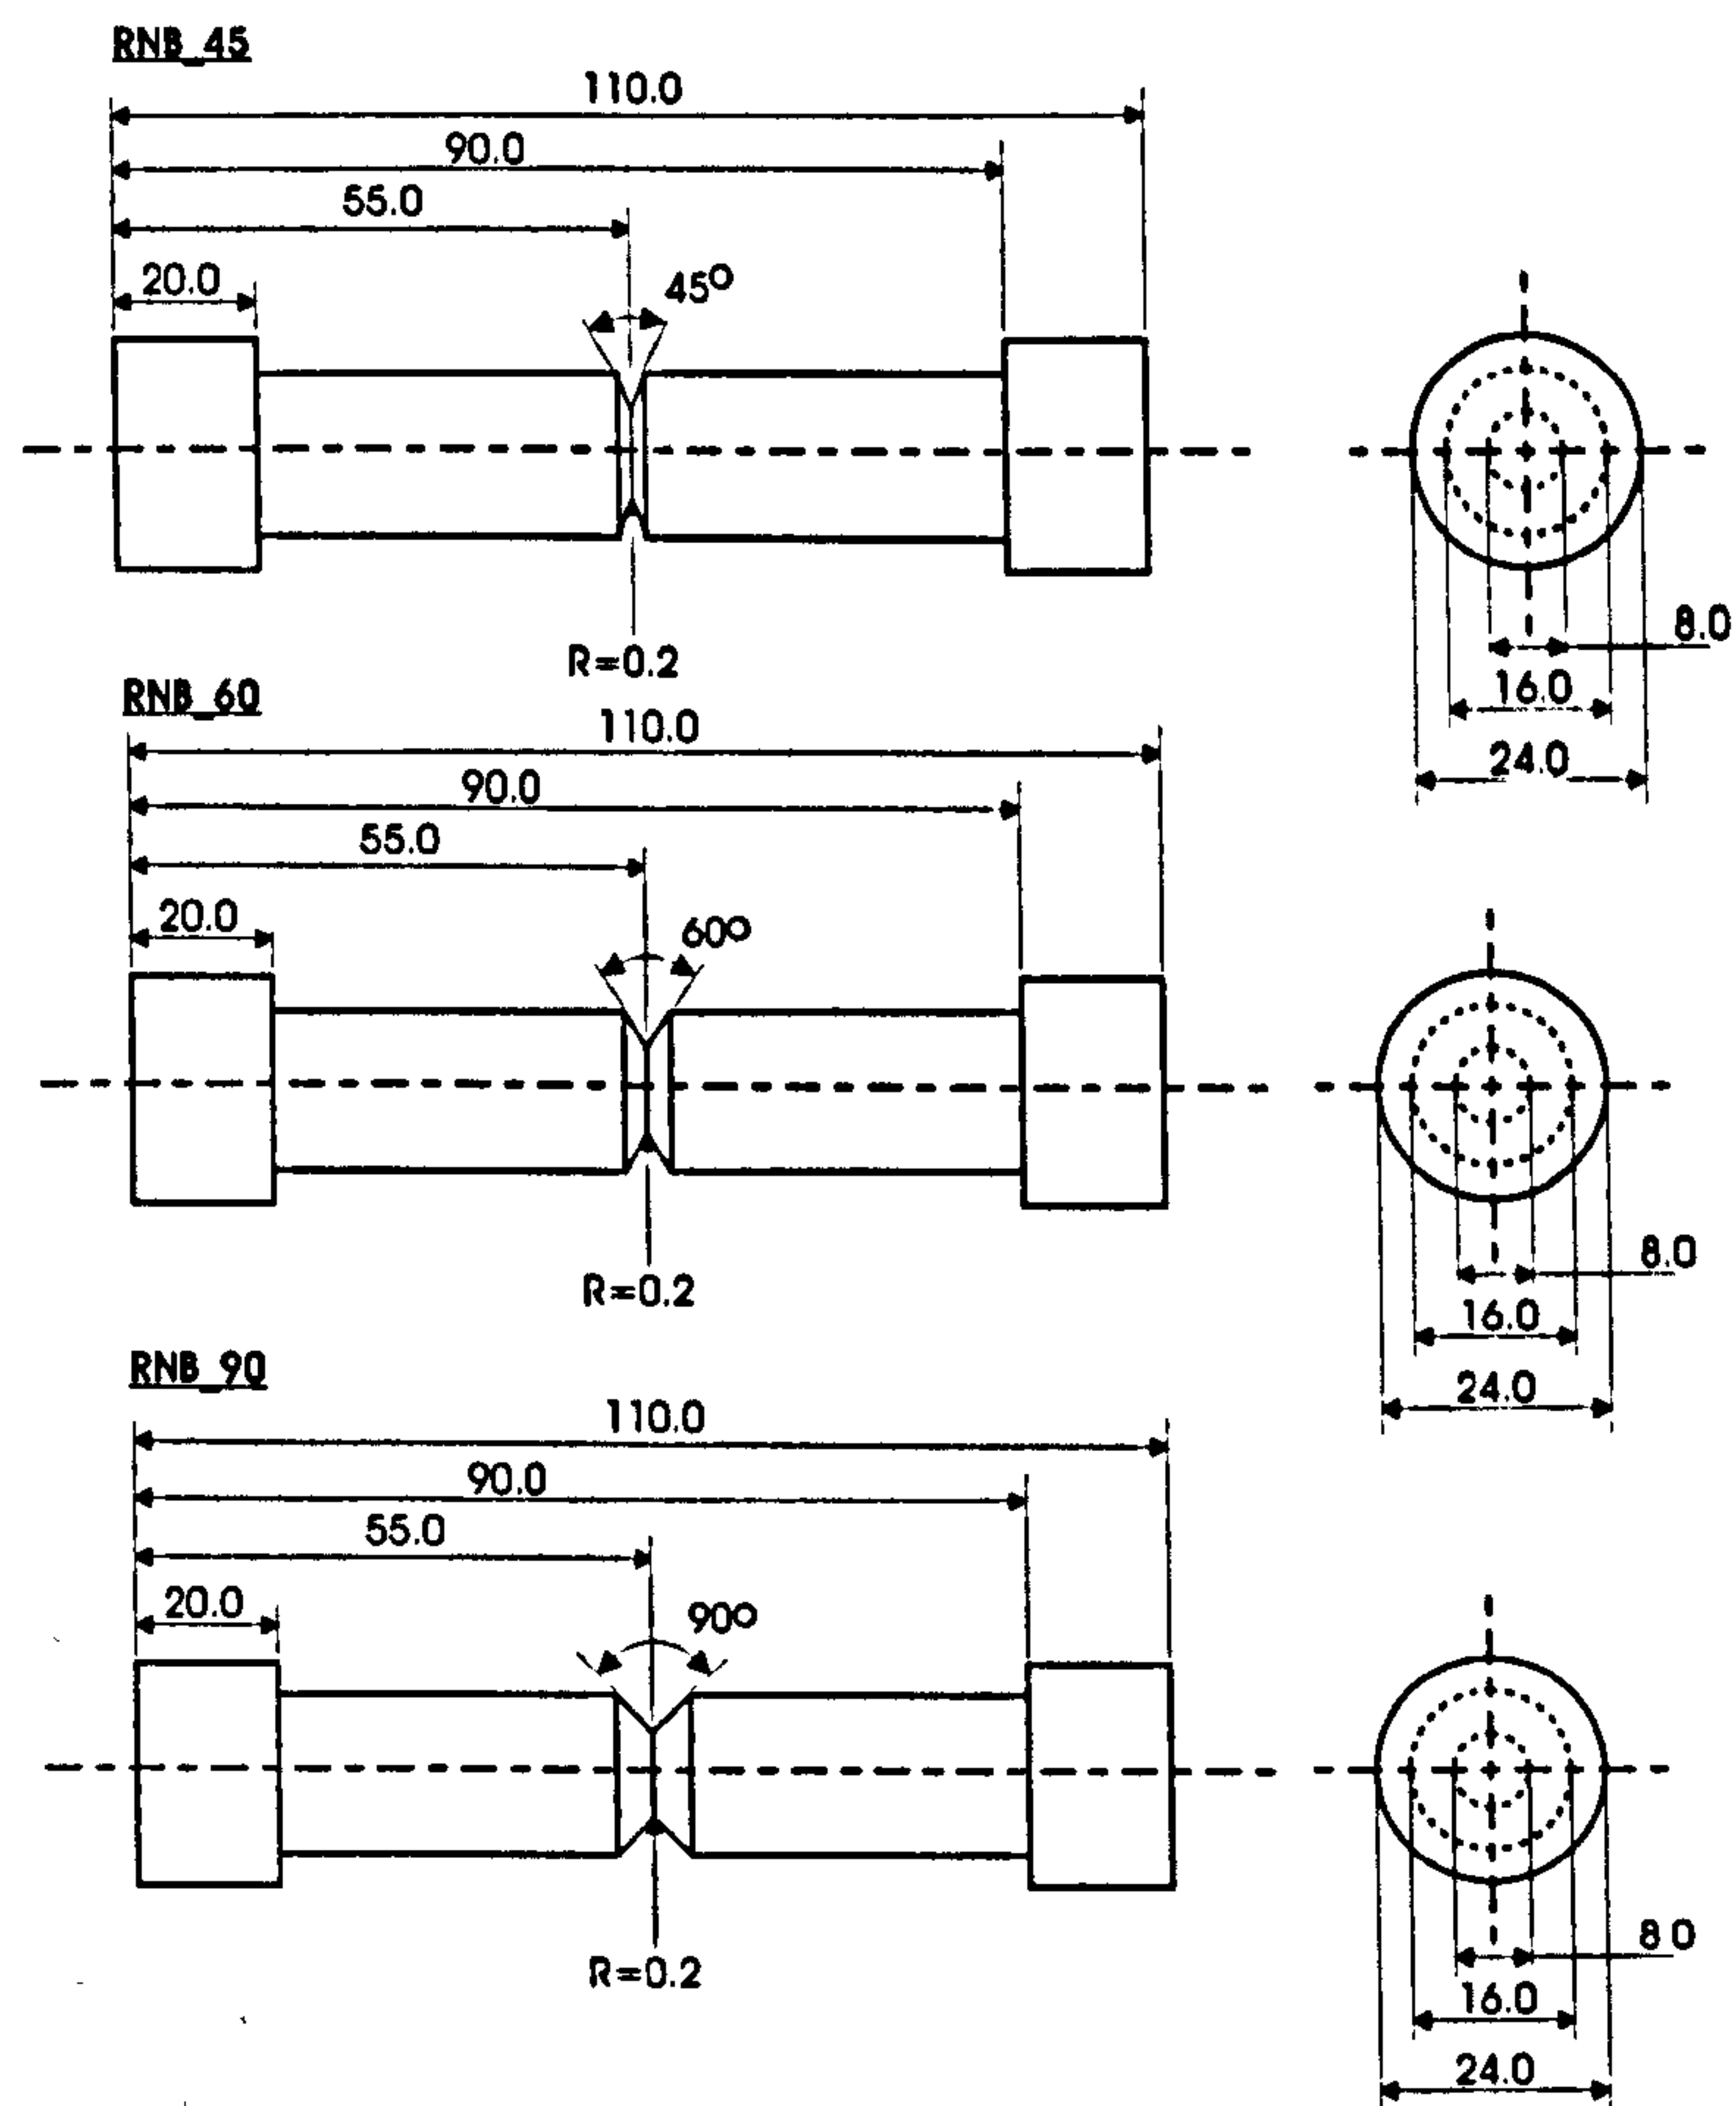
Geometry of RNB specimens, dimensions in mm.
